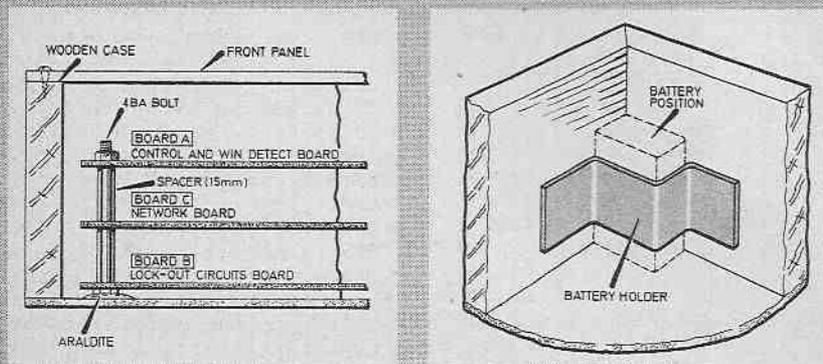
Interior views of the cabinet. The diagram left, shows the circuit board mounting arrangement and the one on the right shows the battery mounting clip.
